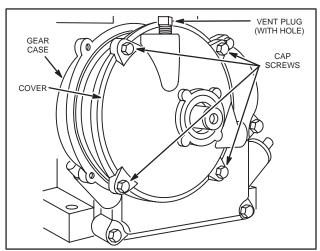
DRAINING GEAR REDUCTION AND REMOVING COVER
